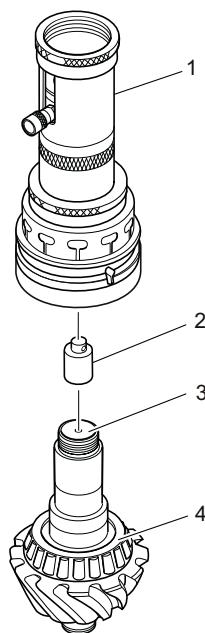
Hydraulic Bearing Puller Tool Assembly
